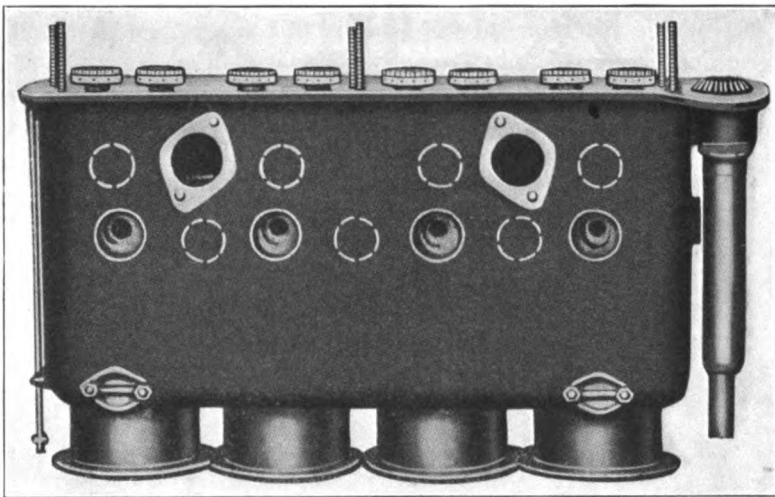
Cylinder and sleeve assembly, models A, I and E.
